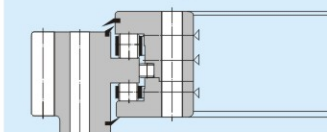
Three-row cylindrical roller combined bearing with external gear
